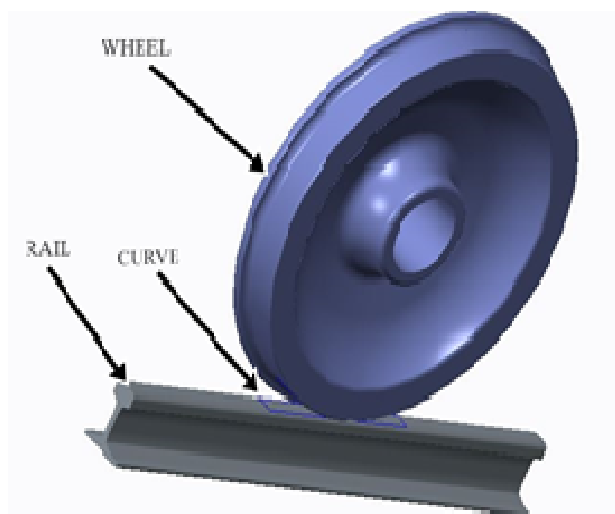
Assembly of Rail-Wheel in Creo parametric 2.0
